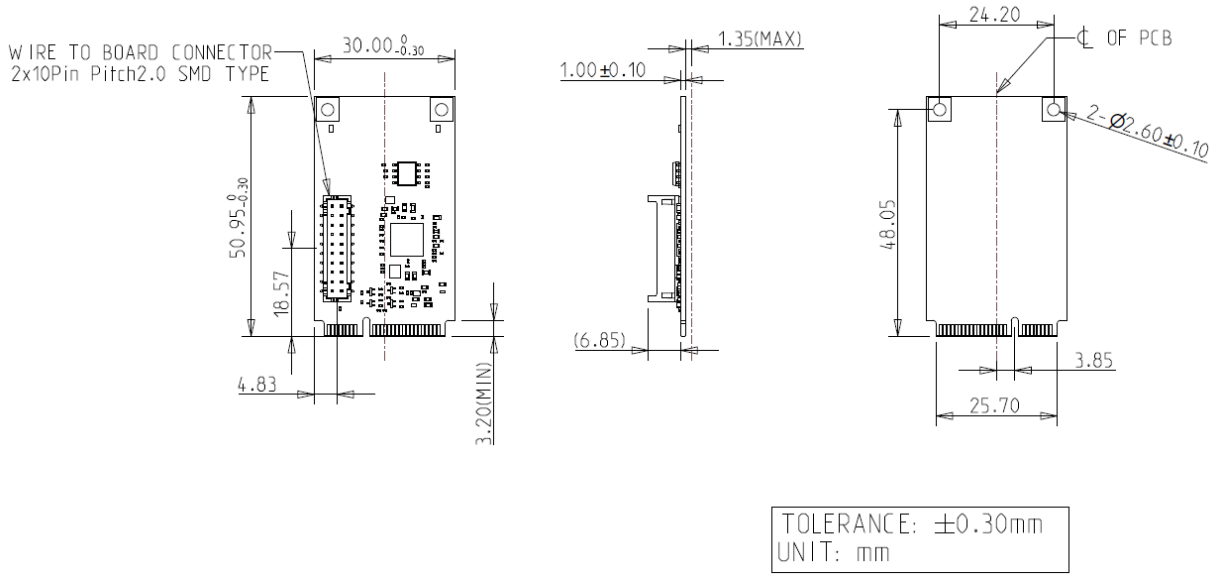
EMPL-G1S1 mPCIe Board Drawing
